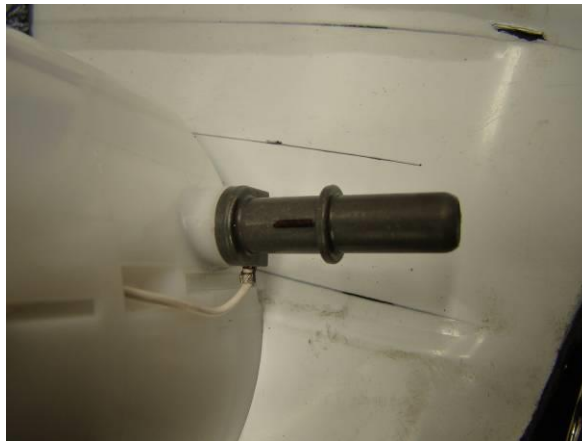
Marking the venturi pump connection on the bottom of the fuel module housing.
